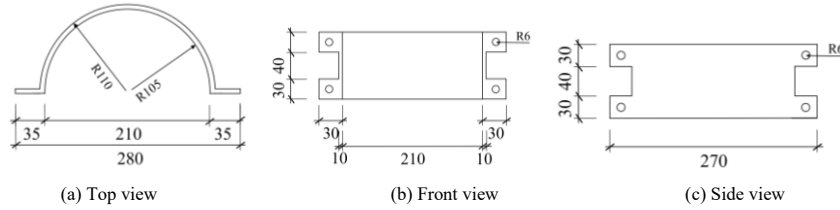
Detailed dimensions of Pu-pai Fang clamp hoops
